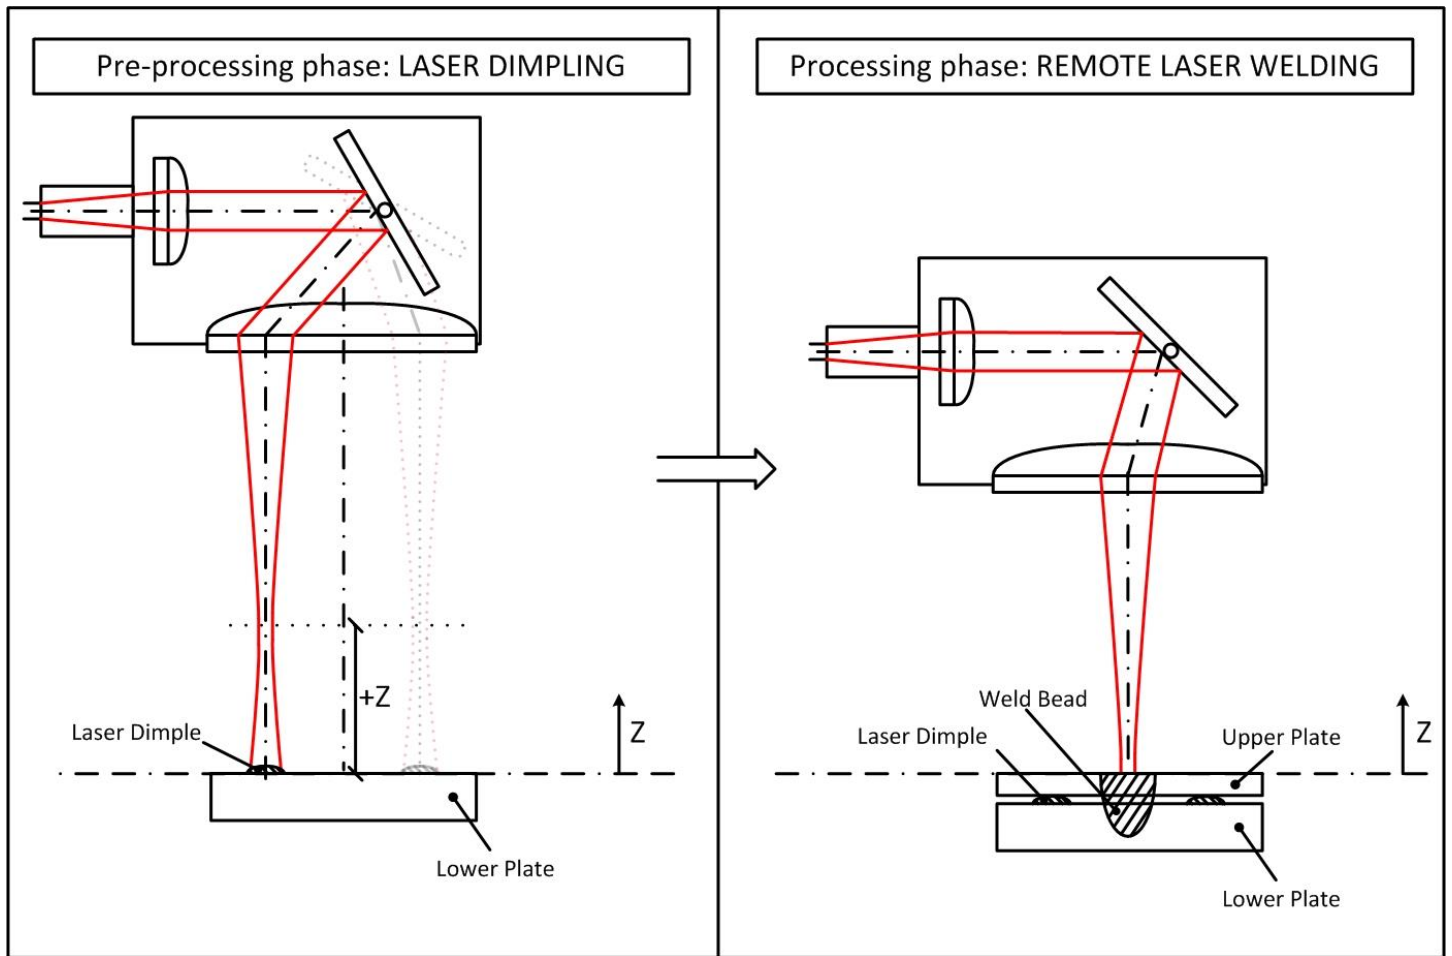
Sequence of the experimental phases for remote laser welding of zinc coated steels.
